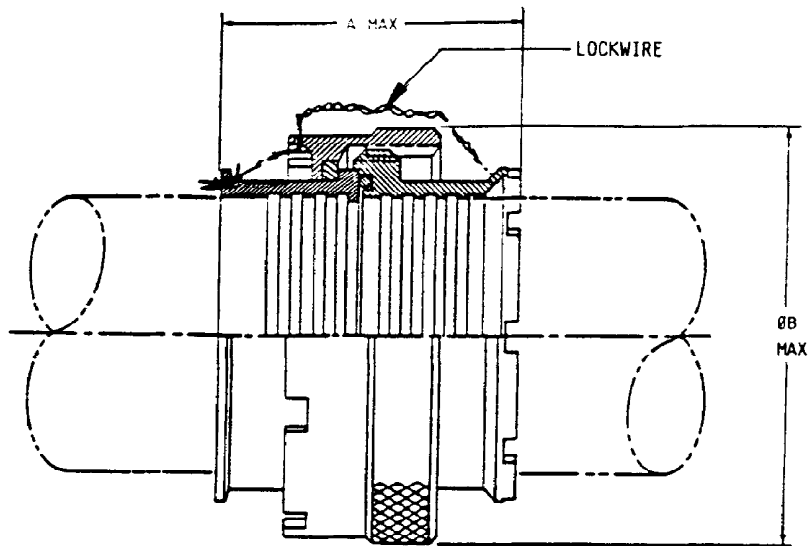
TYPE II COUPLING - ASSEMBLED VIEW
